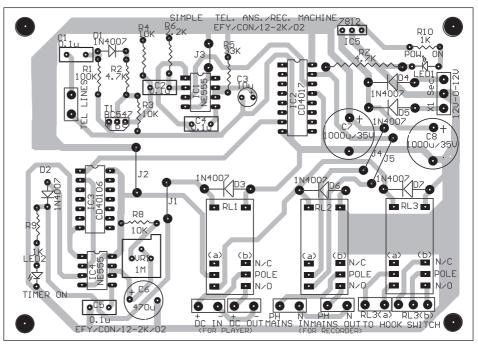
Actual-size, single-sided PCB for the circuit in Fig. 2
